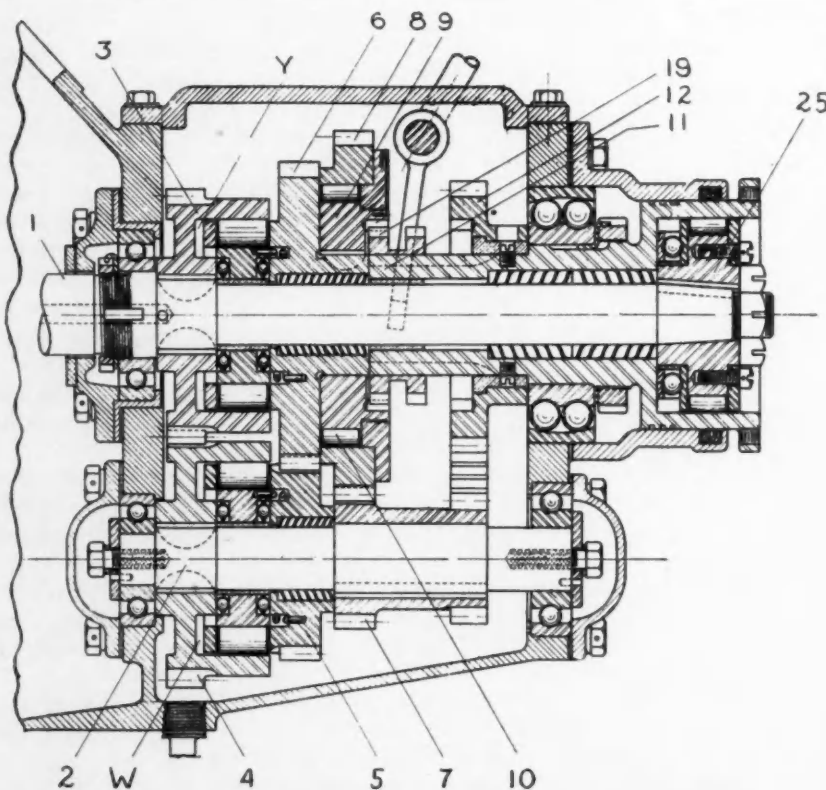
Longitudinal Section of Macallen Self-Shifting Transmission
